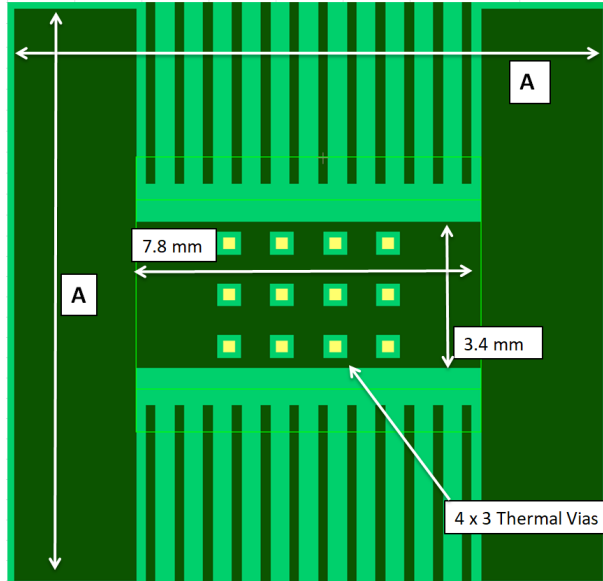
PCB - Top Layer (4/2-Layer PCB) for HTSSOP Package
